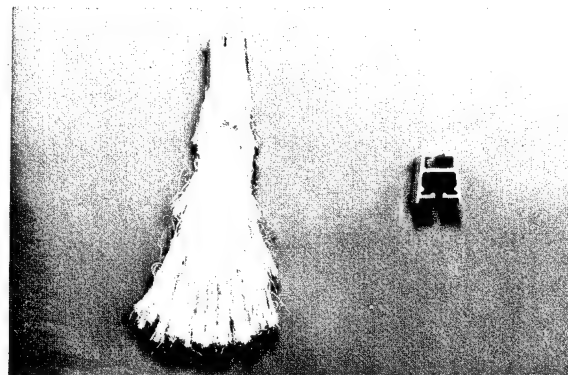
Fixing profile for lighting units. Fabric reinforcement only in the transverse section
